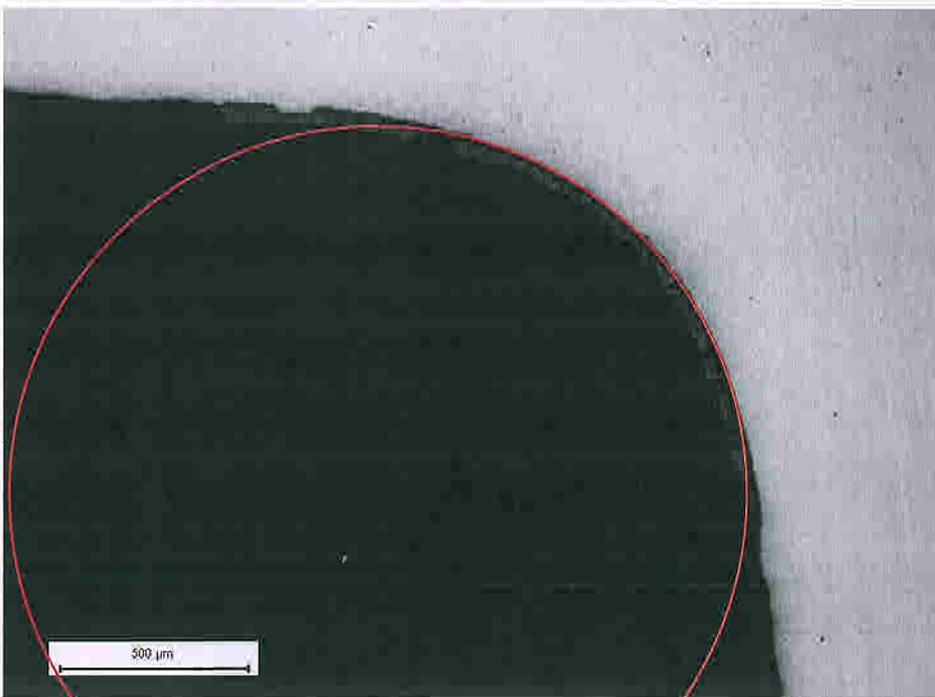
Thread end bottom in the -190 screw. $R=0.28$ mm (min=0.25).
